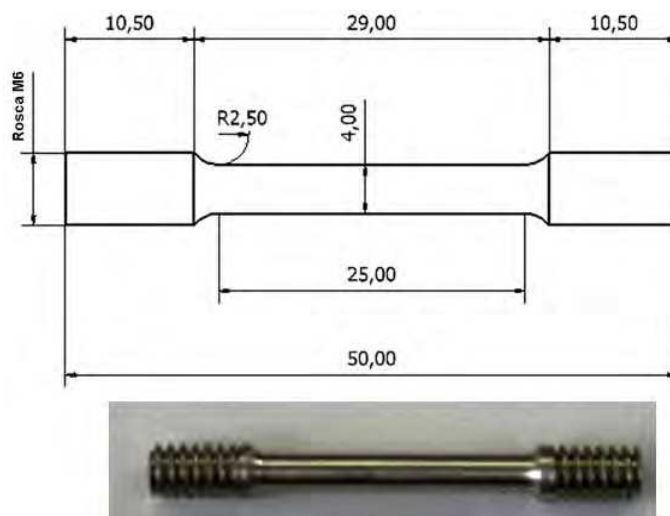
Slow Strain Rate Test specimen (dimensions in mm).
